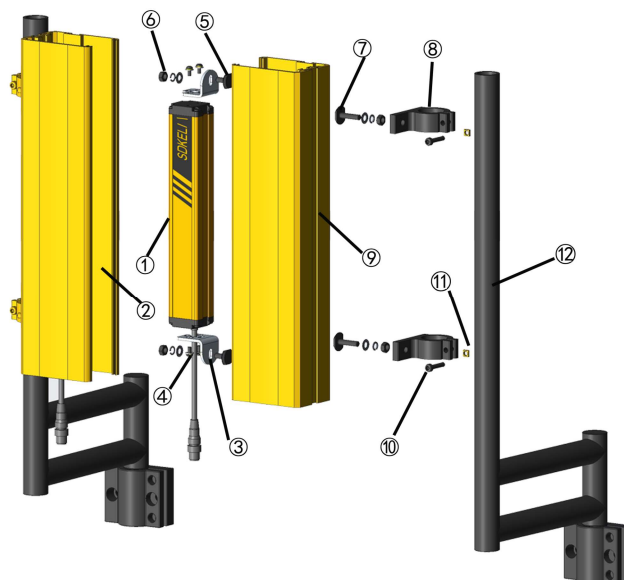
Scatter shield double-arm mounting (SF)
